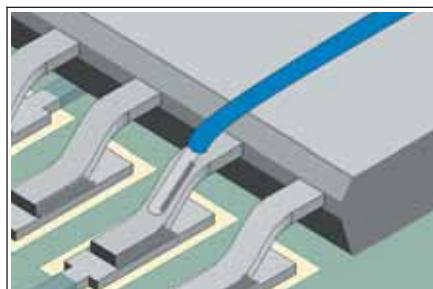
Acceptable Wire soldered to lifted component lead. +
